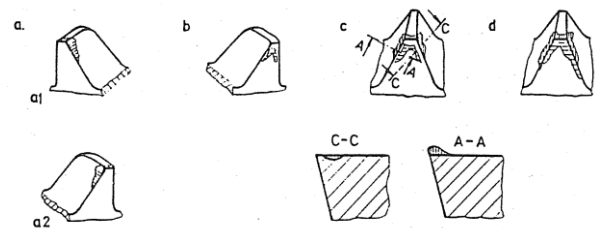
Shape and position of wear zones on the hob milling tool tooth
